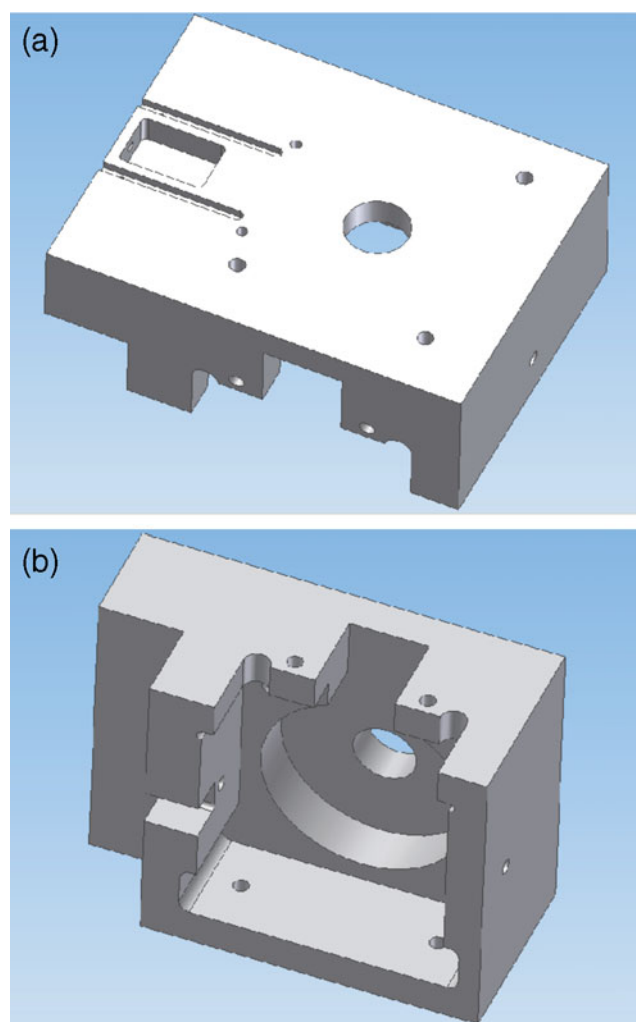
CAD drawings of the fixture used to accommodate the manipulator and Cu block in the *in situ* sample holder. (a) The fixture is viewed from the top, i.e., the side facing the detector when mounted in the ESEM. (b) It is viewed from the bottom, i.e., the side facing the Peltier cooling stage.
